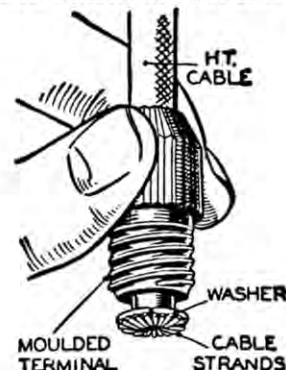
Assembly of original Lucas connectors for high-tension terminals on distributor cap & coil. No other type works well on these distributors.
